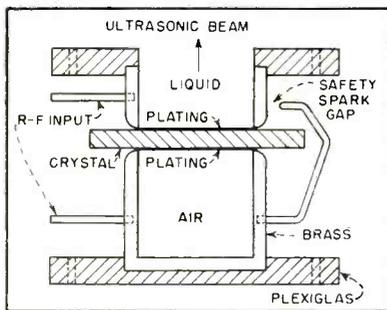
Cross-sectional view of improved crystal holder, showing design details and materials used
